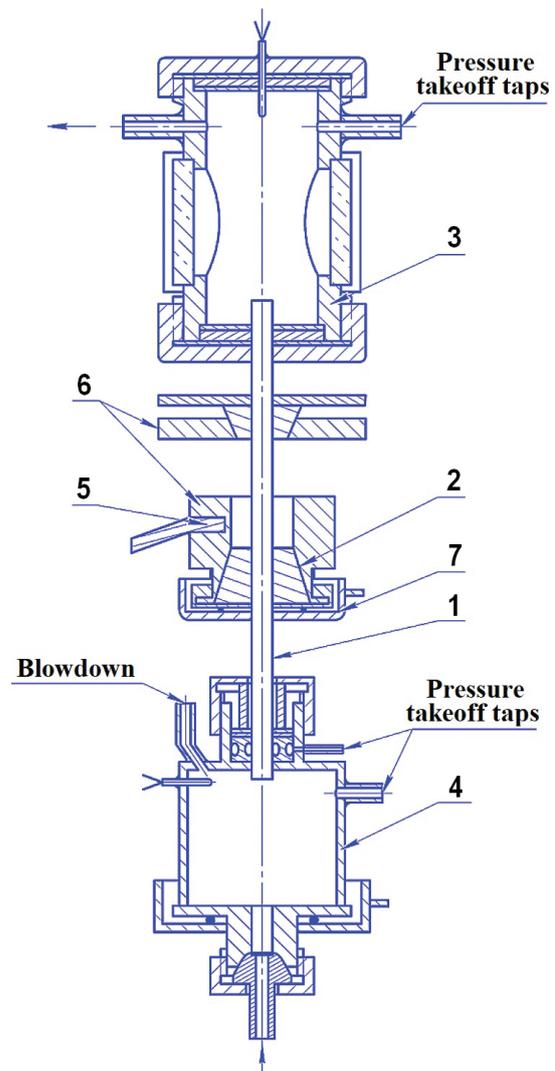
Diagram of the test section: 1 – channel; 2 – cone; 3 – upper chamber; 4 – lower chamber; 5 – lower current lead; 6 – busbars; 7 – liner with springs.
